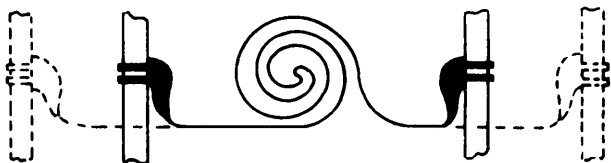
Flat Cable Used as Expandable Roll-Up Jumper (Ref. 14)
